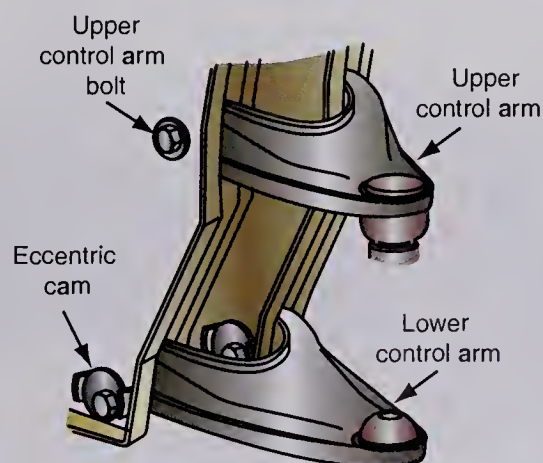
Cam adjustment on the inner ends of the lower control arms.
